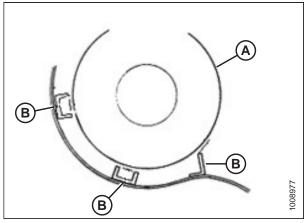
End View Diagram Showing Auger and Stripper Bars
